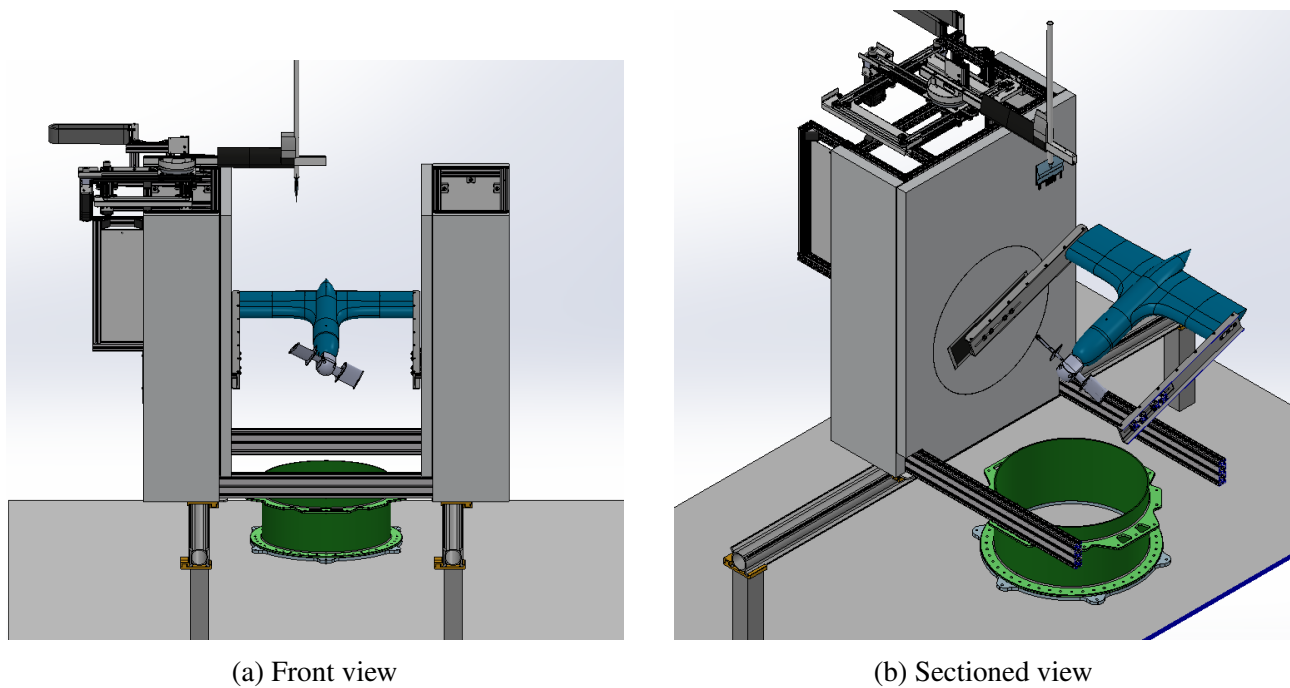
Front and sectioned view of the TUC-TUC rotor system.
